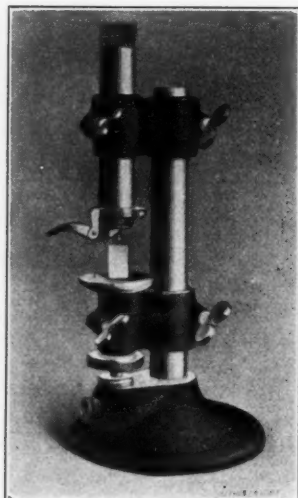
The Minimeter mounted for Measuring on Flat Surfaces
